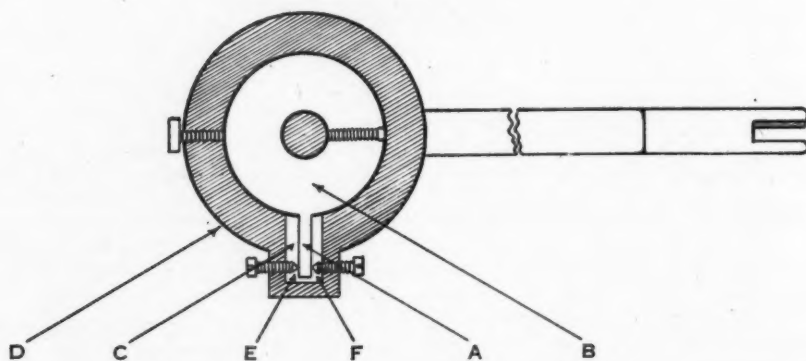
Detail of Prism Table Actuating Arm, showing Fine Adjustment
